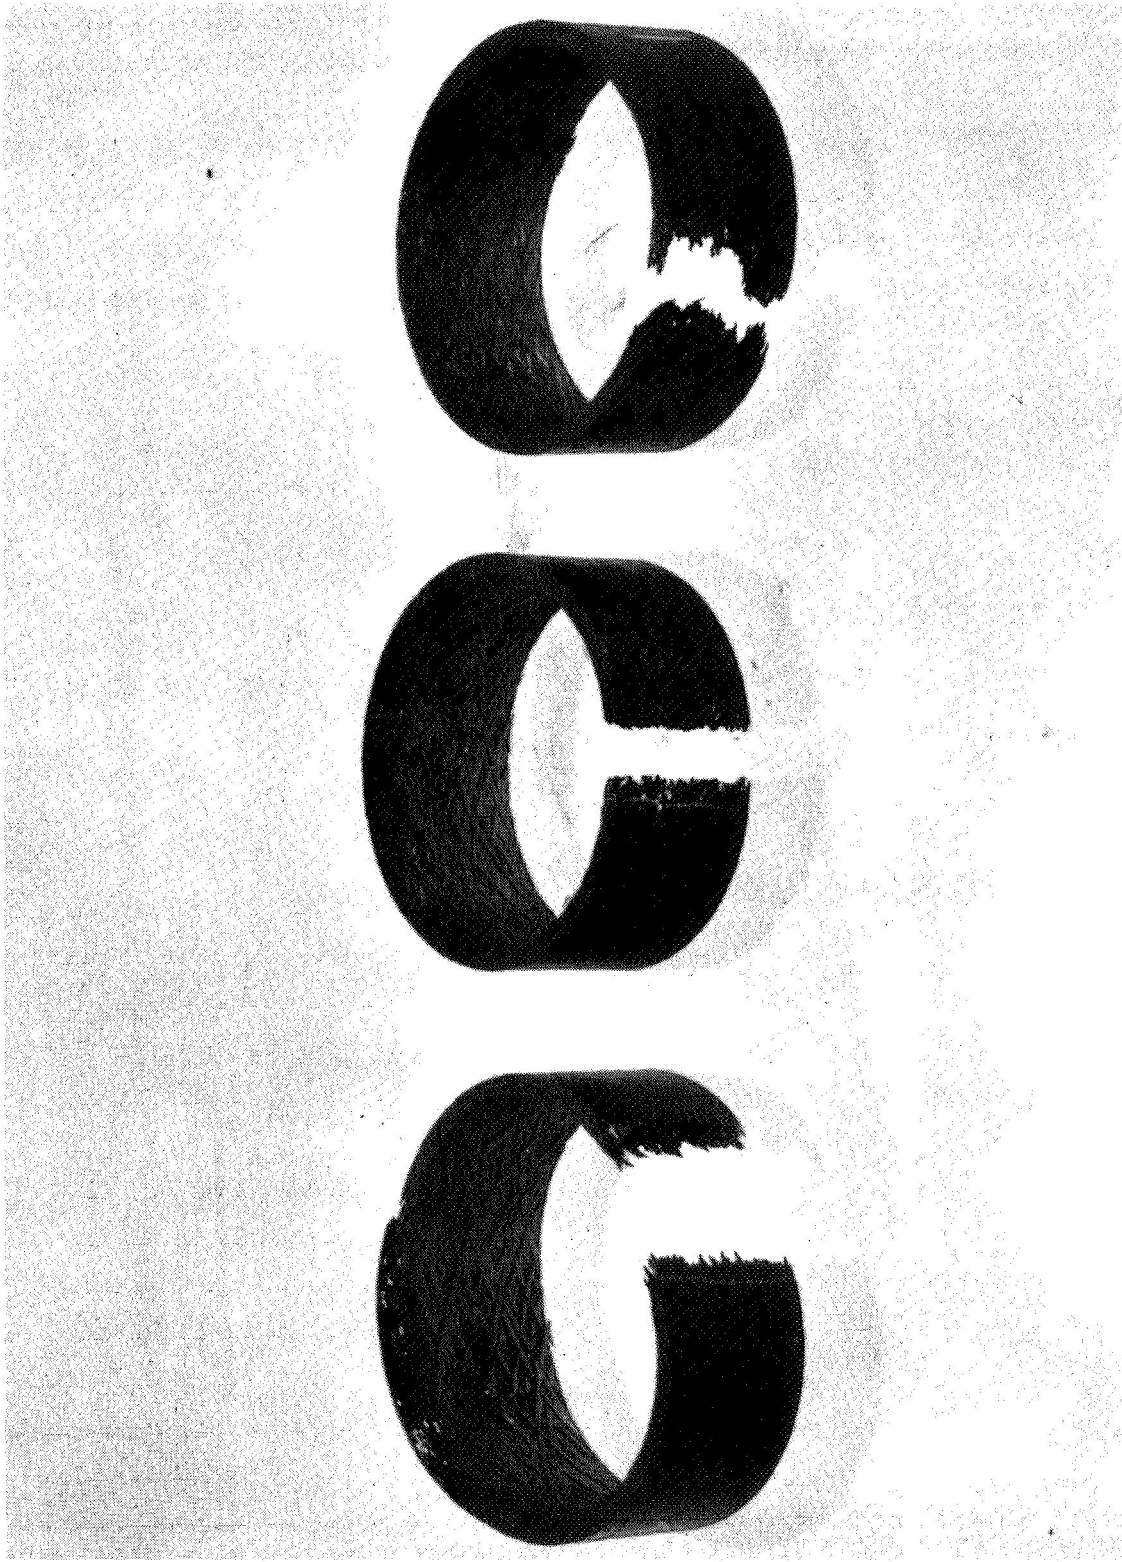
PG/Thornel/PG Tensile Test Rings after Failure
